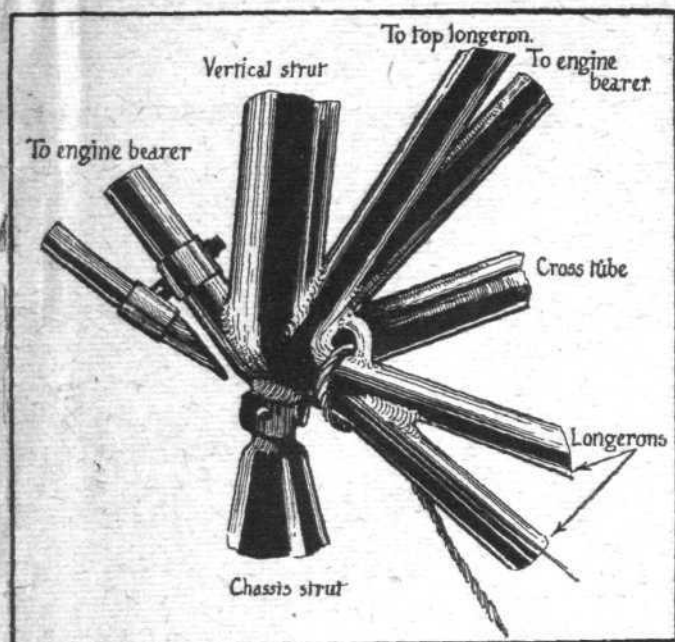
A good idea of the extent to which welding is carried in the body of the Fokker biplane can be formed from the accompanying sketch, which shows a joint, or rather a series of joints, where eight different parts meet and are welded together. Needless to say, the making of such a joint would call for the highest skill.
